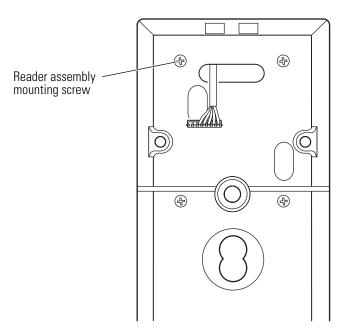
Removing and reinstalling the screws for the B.A.S.I.S. magnetic stripe reader assembly
